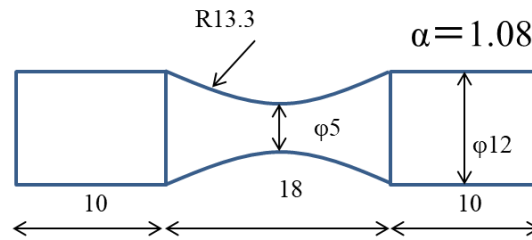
Shape of torsional fatigue test specimen, dimensions in mm.
